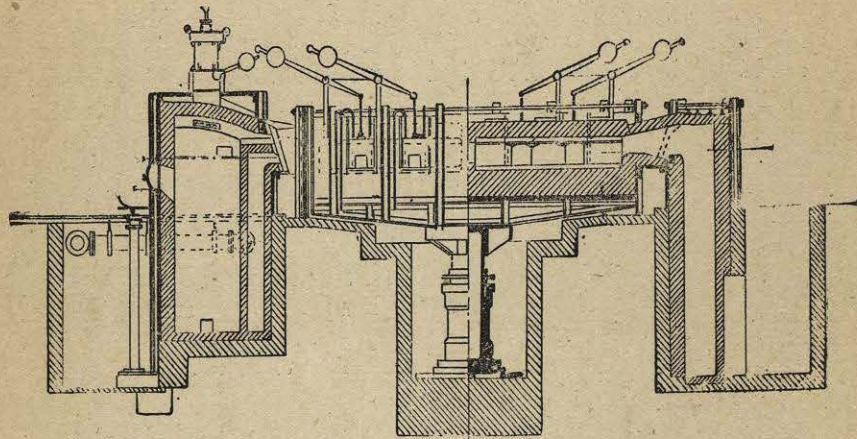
Sectional Elevation—The Pietzka Reheating Furnace.
